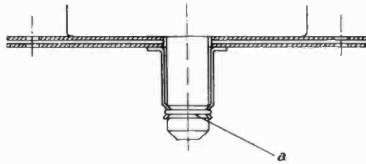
In this valve holder the valve is kept firmly on the base by a constriction on the spigot.
